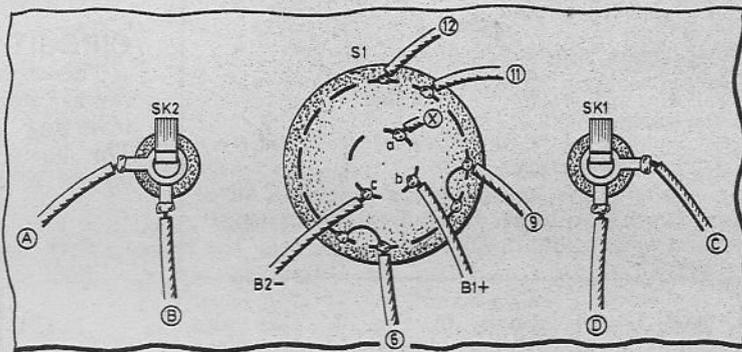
Component layout and wiring for the plain perforated board. The wiring for the front panel components S1, SK1 and SK2 are also shown.
